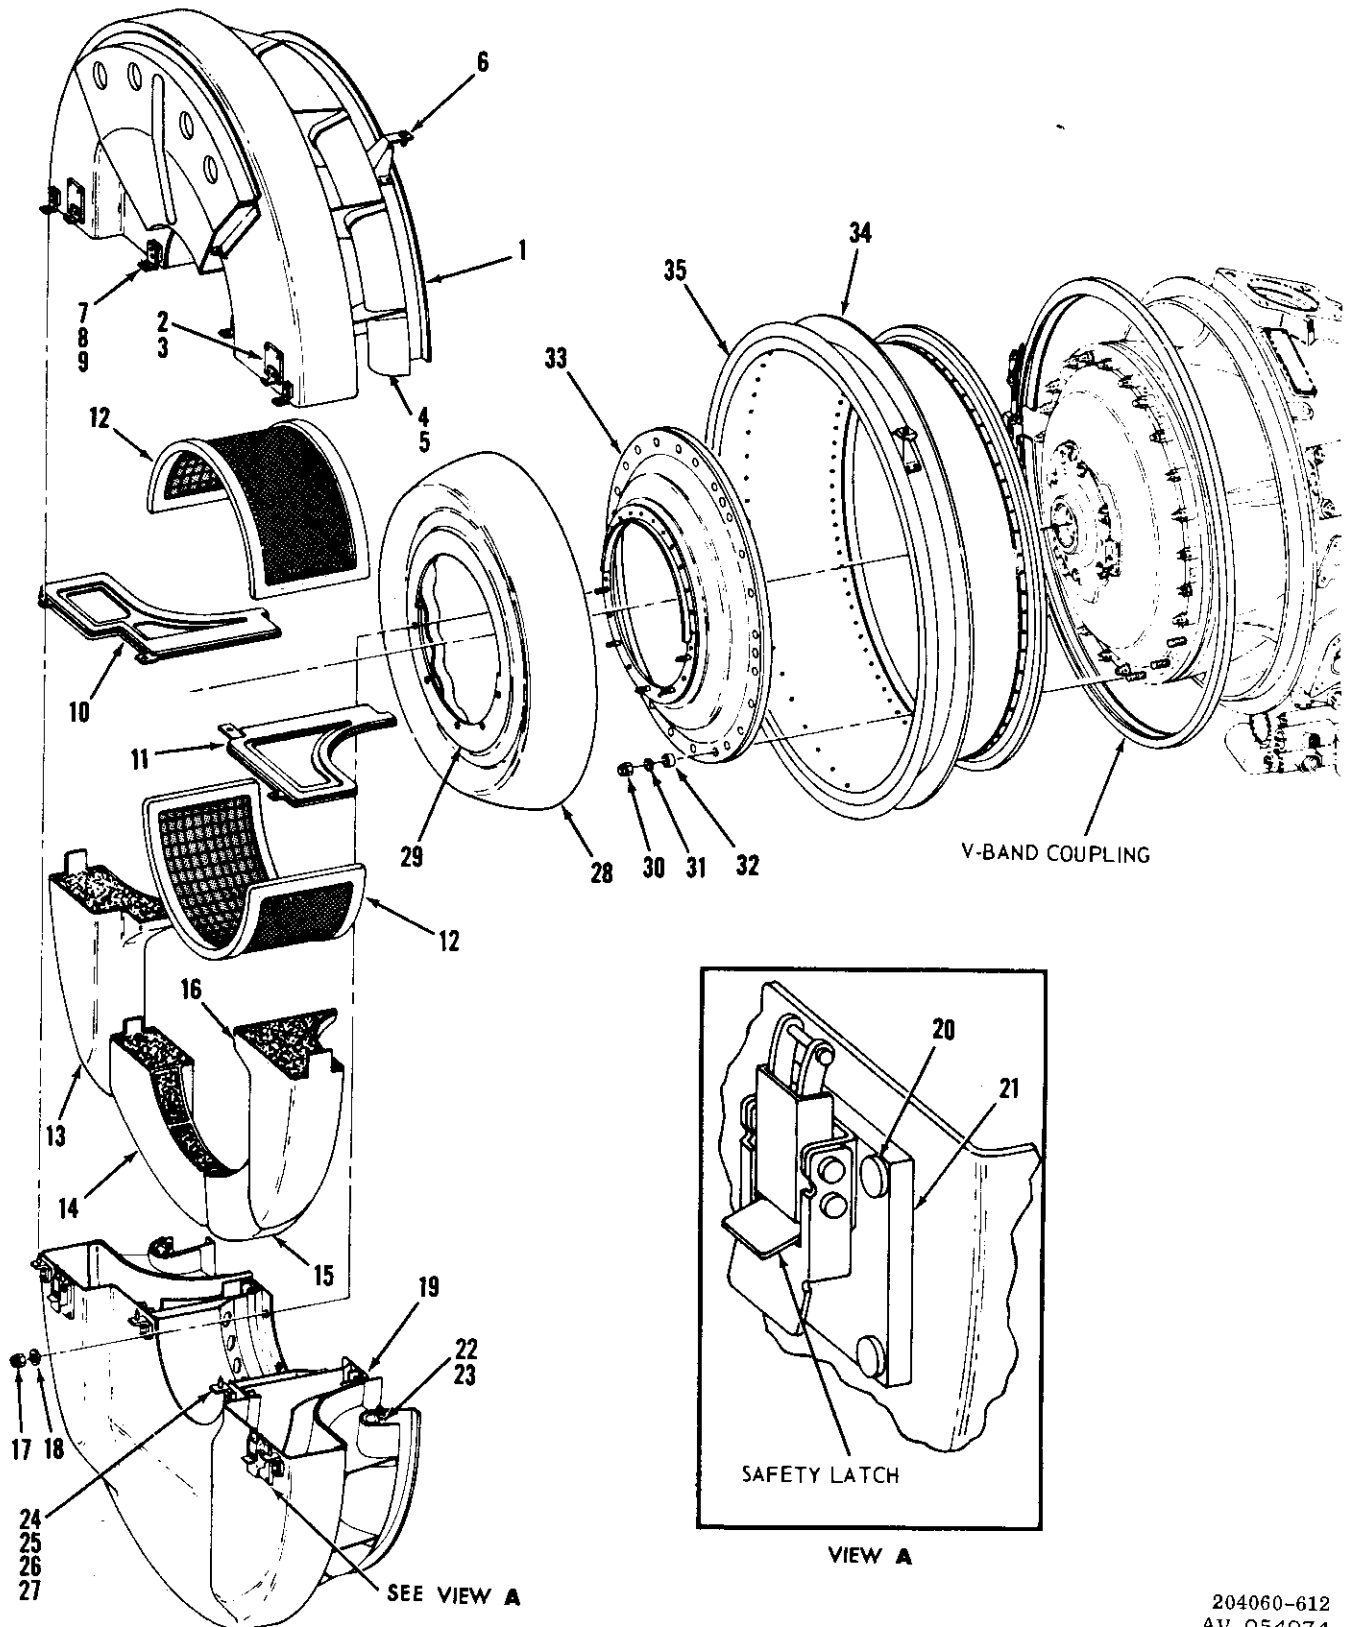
Sand and dust separator (Sheet 1 of 2)
